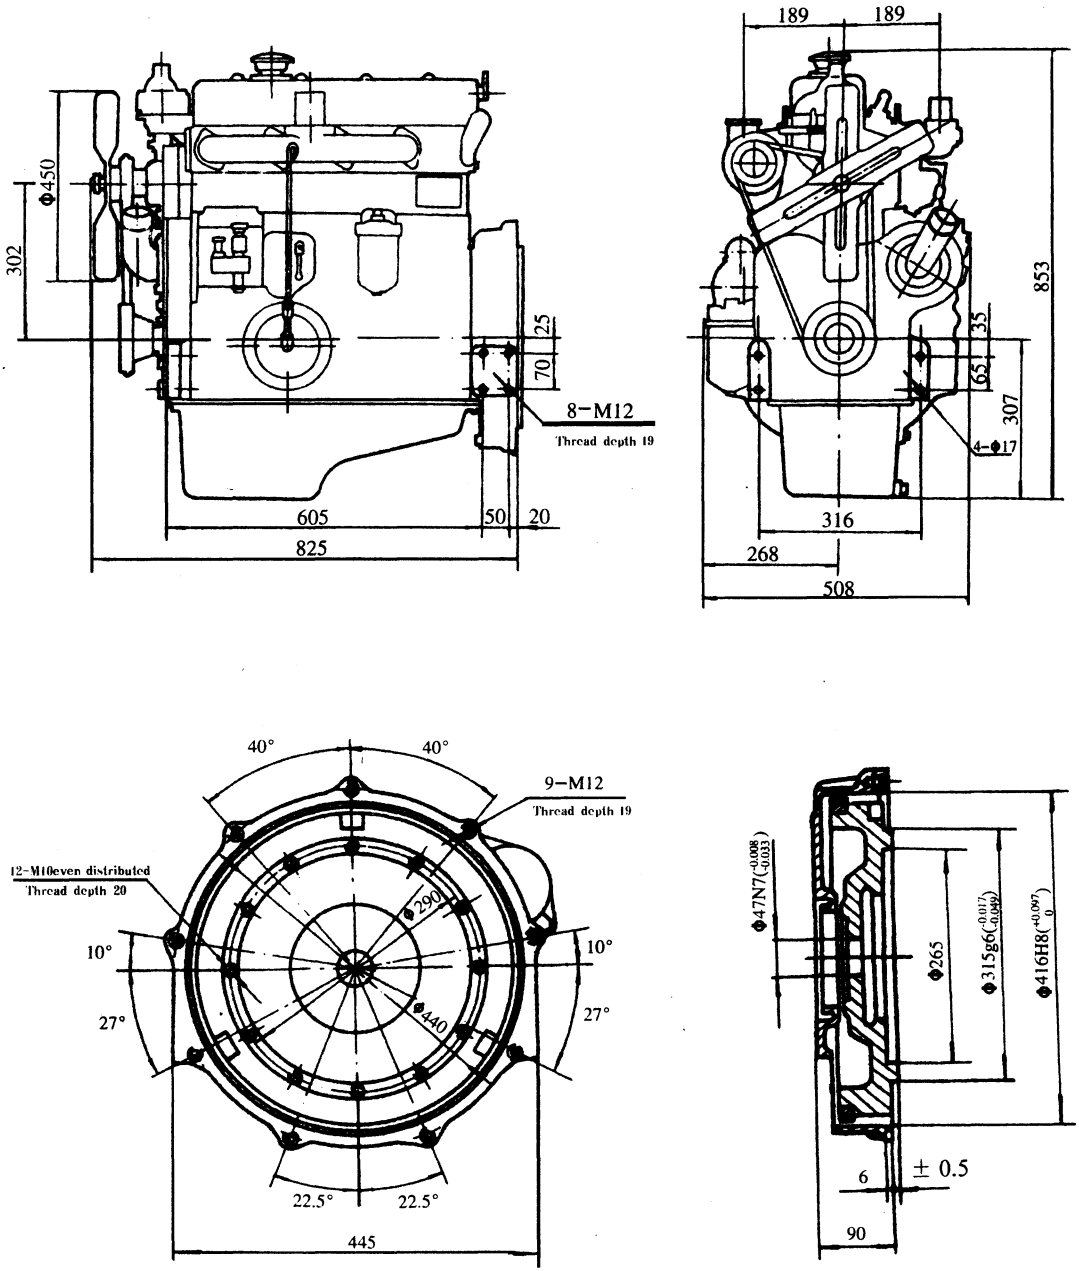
Outline drawing for 495G1, 495G9, K4100G1 diesel engine
